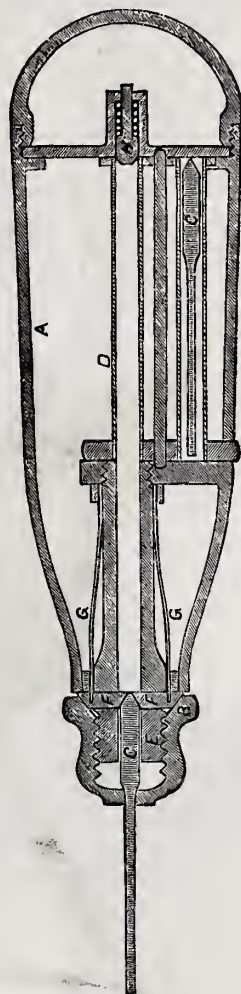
Sectional View, Showing One of the Tools in Position for Use.
